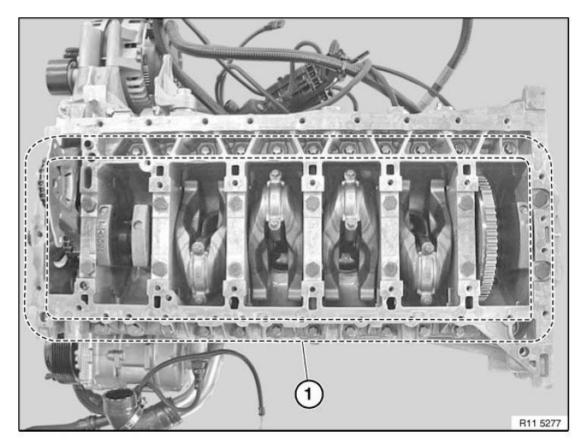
Identifying Crankshaft Bolt Mounting Area Courtesy of BMW OF NORTH AMERICA, INC.
